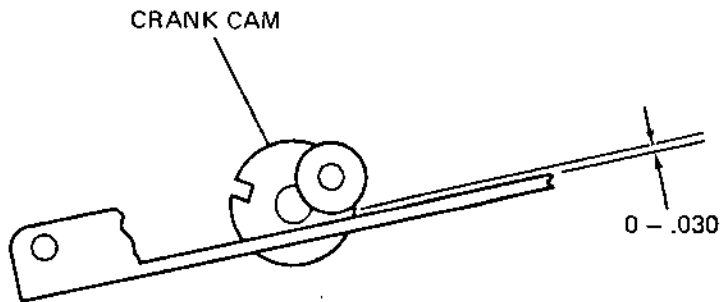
A. Eject Motor Cam Alignment Check - Carrier Open
